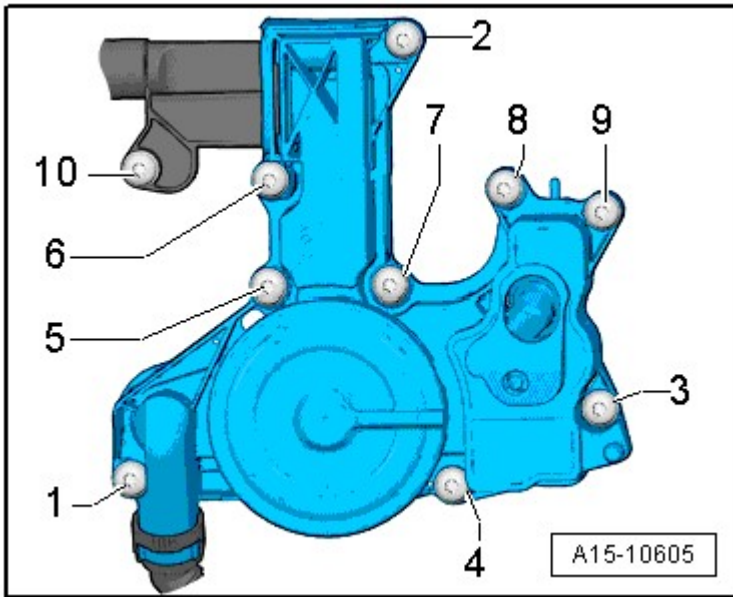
Identifying Crankcase Ventilation - Tightening Sequence
